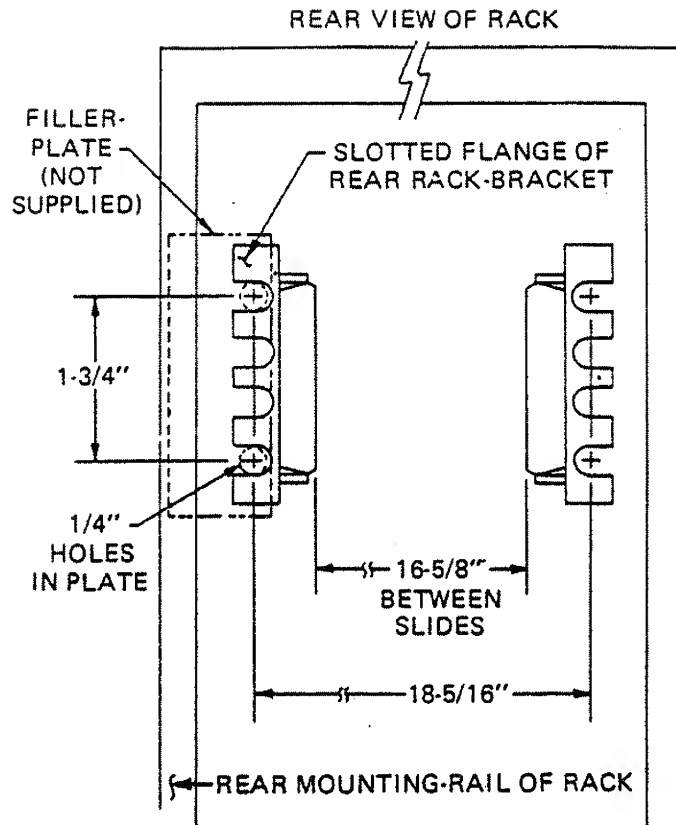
Rear End Slide-Mount Rack Dimensions
